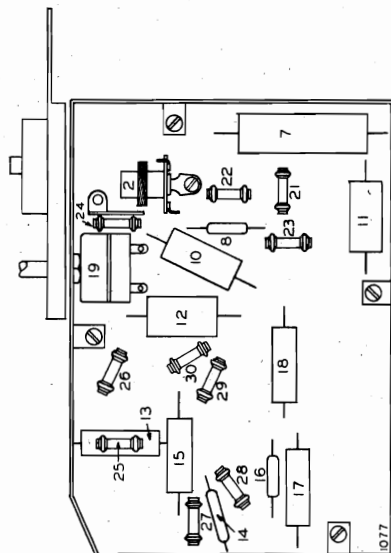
PARTS LOCATING DIAGRAM PORTABLE RADIO #985651
